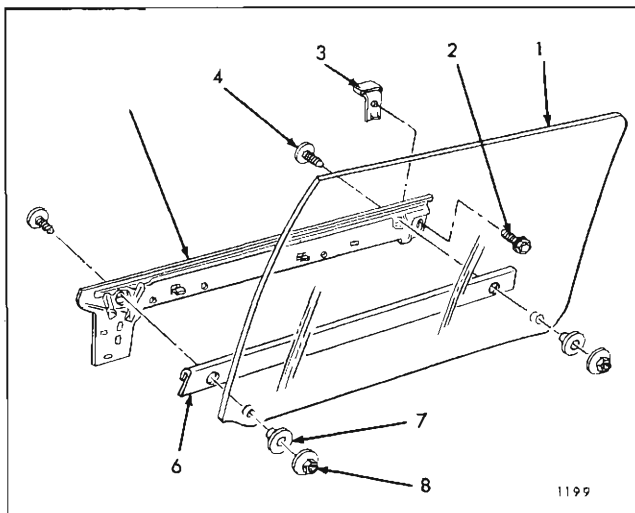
D64—Rear Door Window Assembly - 68069 Style
